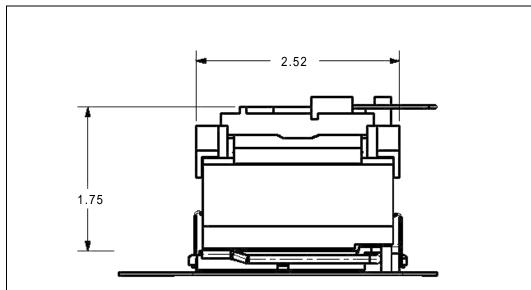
Side View of Space Requirements for the Boxed Processor - View #1
